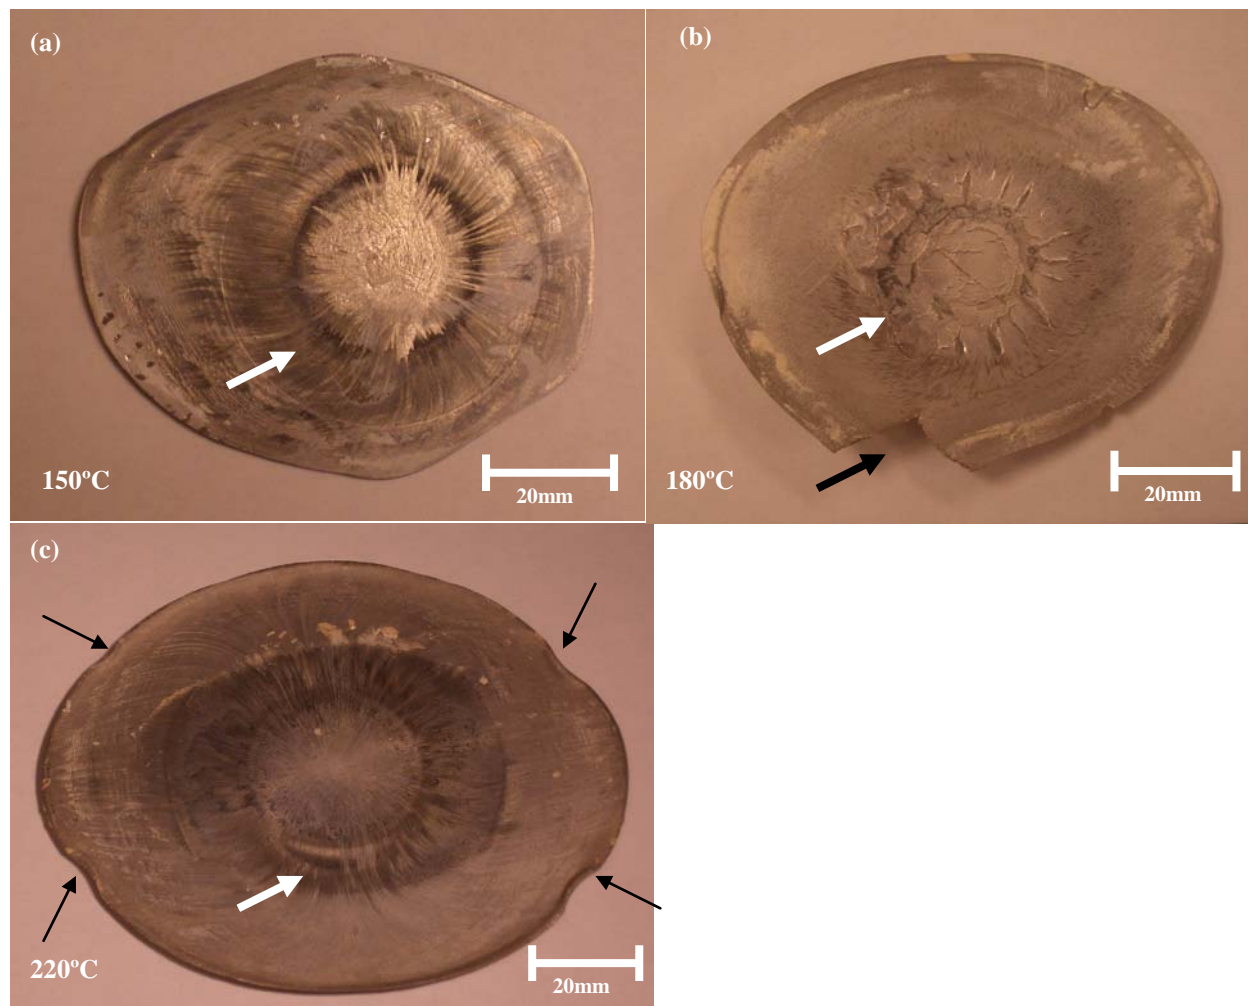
Photo images of extruded ZK60 disks. The extrusion temperatures are set at (a) 150°C (b) 180°C (c) 220°C. Biaxial extrusion marks are clearly shown on the extruded disks as marked by the white arrows. All three disks have the same thickness of 0.08 inch. The one extruded at 180°C has a crack near edge. Four round indents as marked by the black arrows in (c) indicated the place where ZK60 disk made contact with the bolts of the die set.
